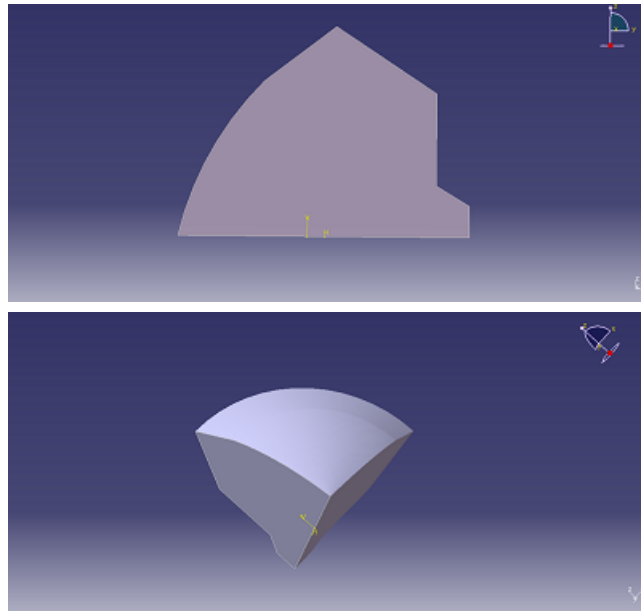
Technical Drawing of Hayabusa Capsule
